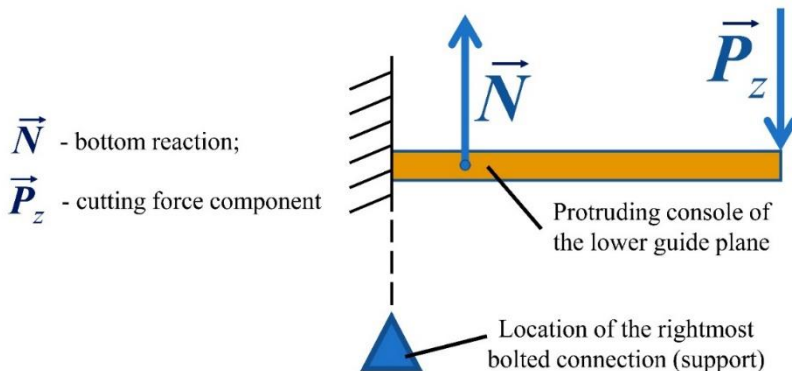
Scheme No. 2 of loading the bottom guide plane of the chute.
